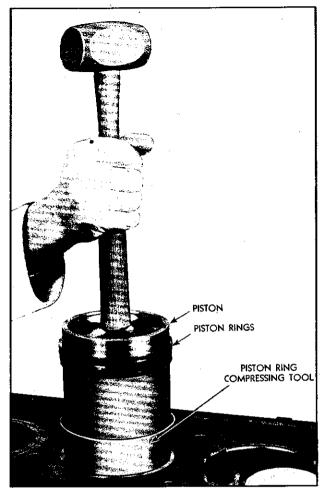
Installing Piston in Cylinder Bore with Tool to Compress Piston Rings.
